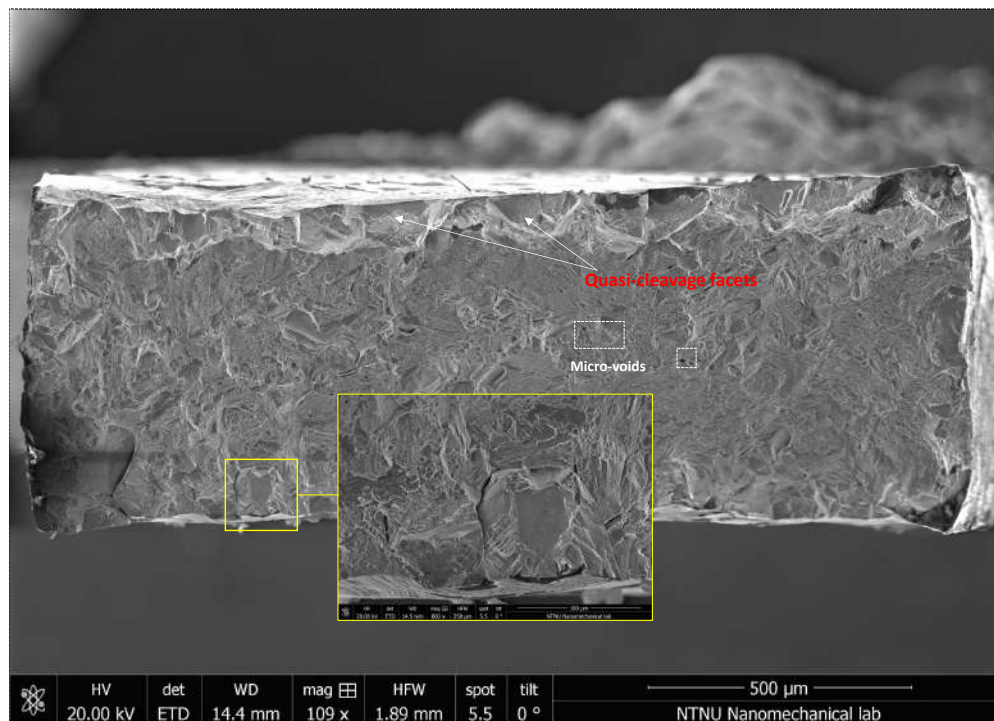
Overview SEM image (109 $\times$) of the fracture cross-section of the electrodeposited Ni-coated Ni 725 specimen after 24 h hydrogen pre-charging, showing a macroscopically flat, faceted fracture surface with limited necking.
